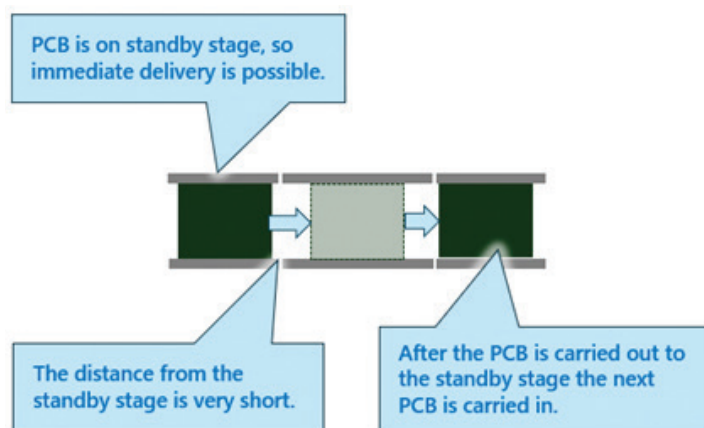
The three-stage conveyor ensures boards can be kept in the machine, to be loaded quickly.
